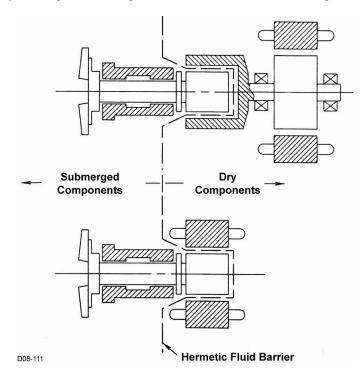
Pump/Motor Coupling (Top figure is conventional magnetically coupled pump. Bottom figure is Honeywell direct drive pump.)
